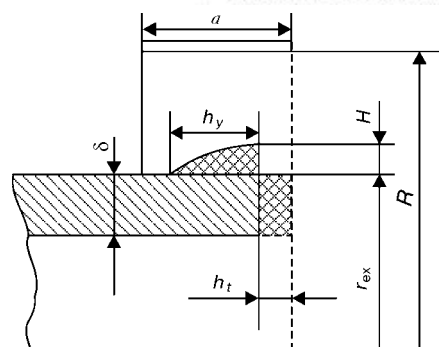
Schematic of the region of upsetting in butt high-frequency and braze welding of pipes
